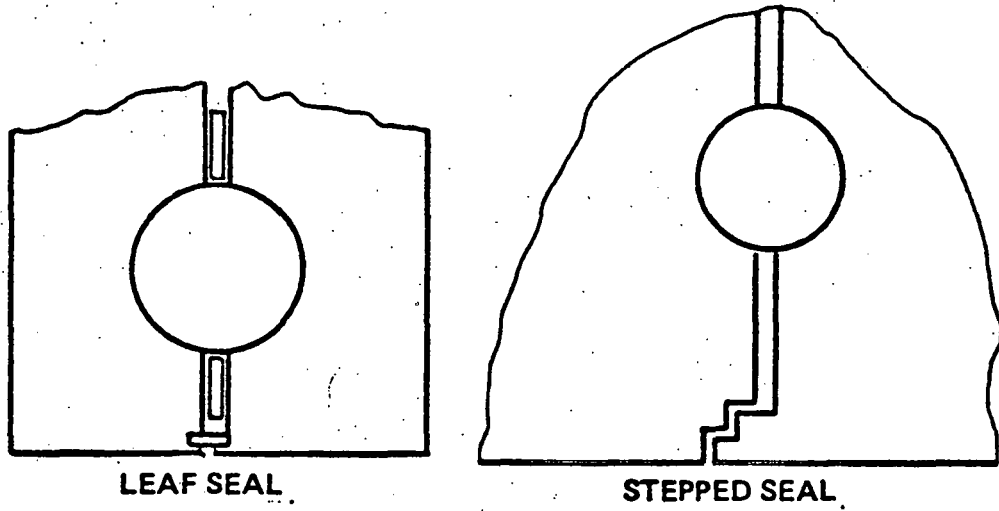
BEARING GREASE SEAL CONFIGURATION
